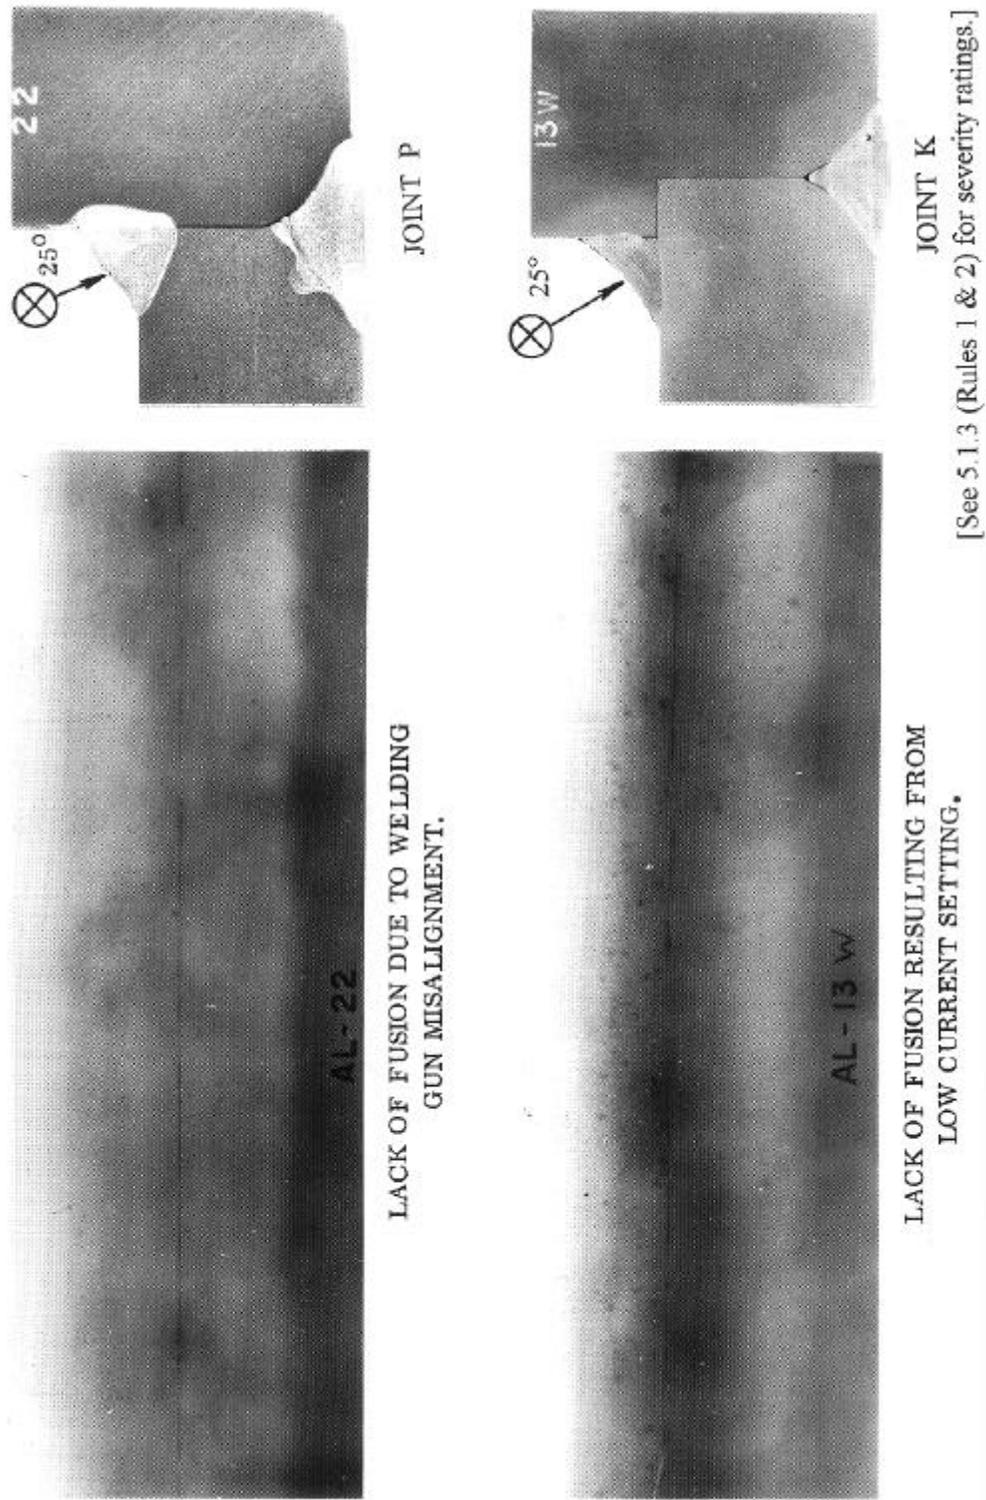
Examples of lack of fusion correlated with weld cross section in aluminum welds.
